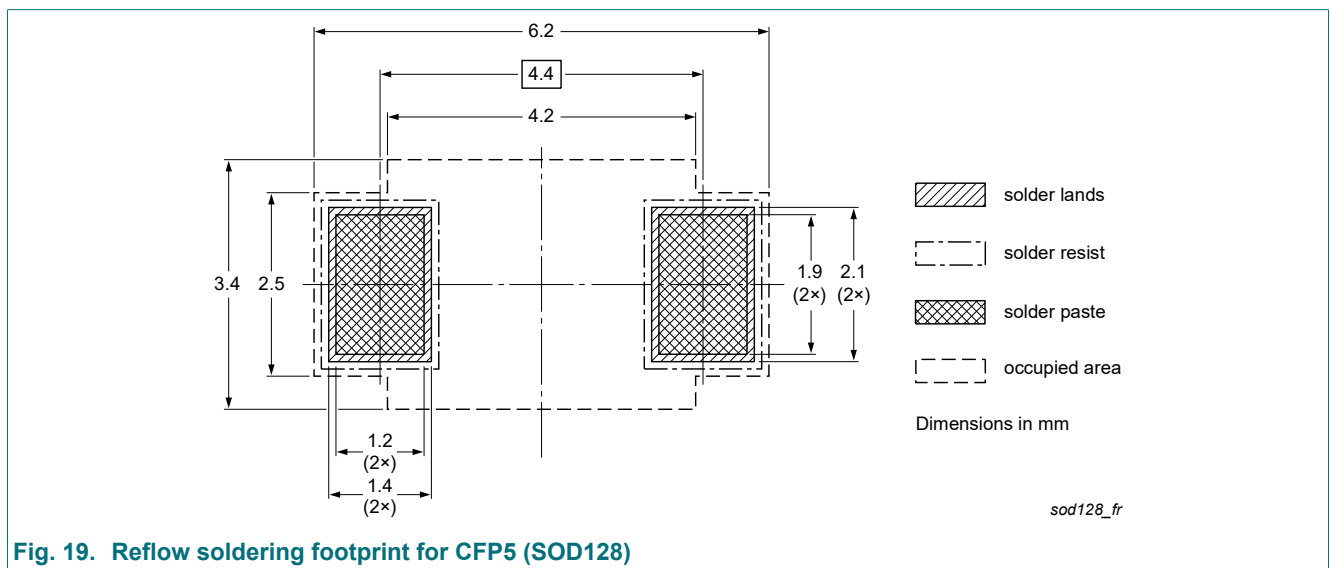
Reflow soldering footprint for CFP5 (SOD128)
